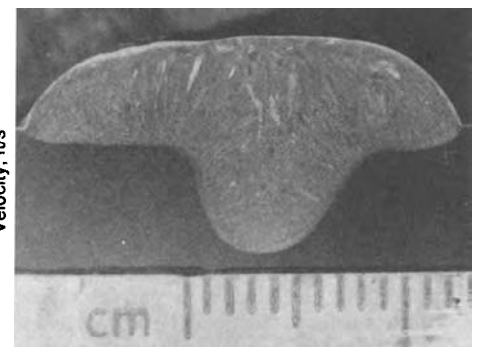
Transverse cross section of gas metal arc bead-on-plate weld in carbon steel to show deep penetration in the weld bead center generated by molten electrode droplets
